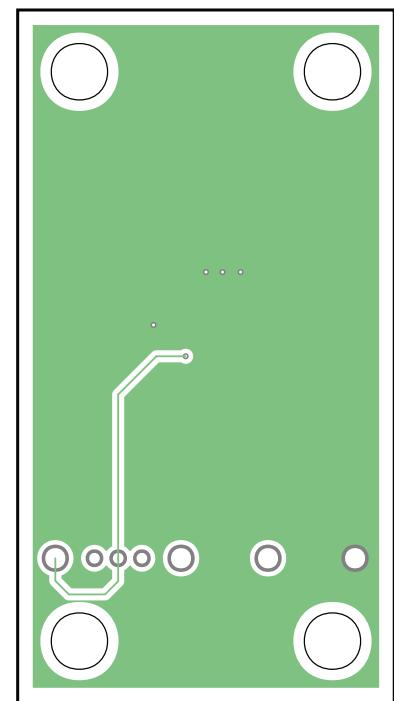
EVAL-ADPL21610-AZ PCB Layout—Internal 3
